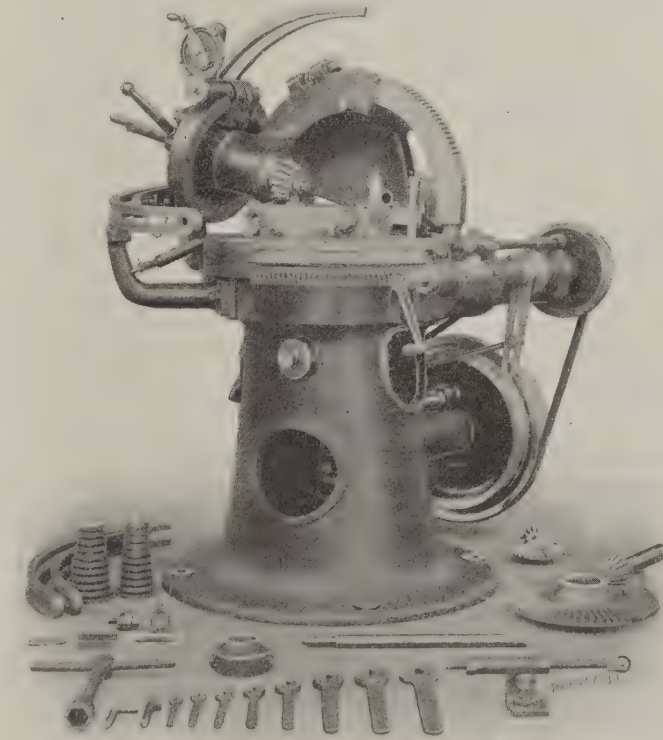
A Machine Involving the Principles Illustrated in Figs. 3 and 4.
